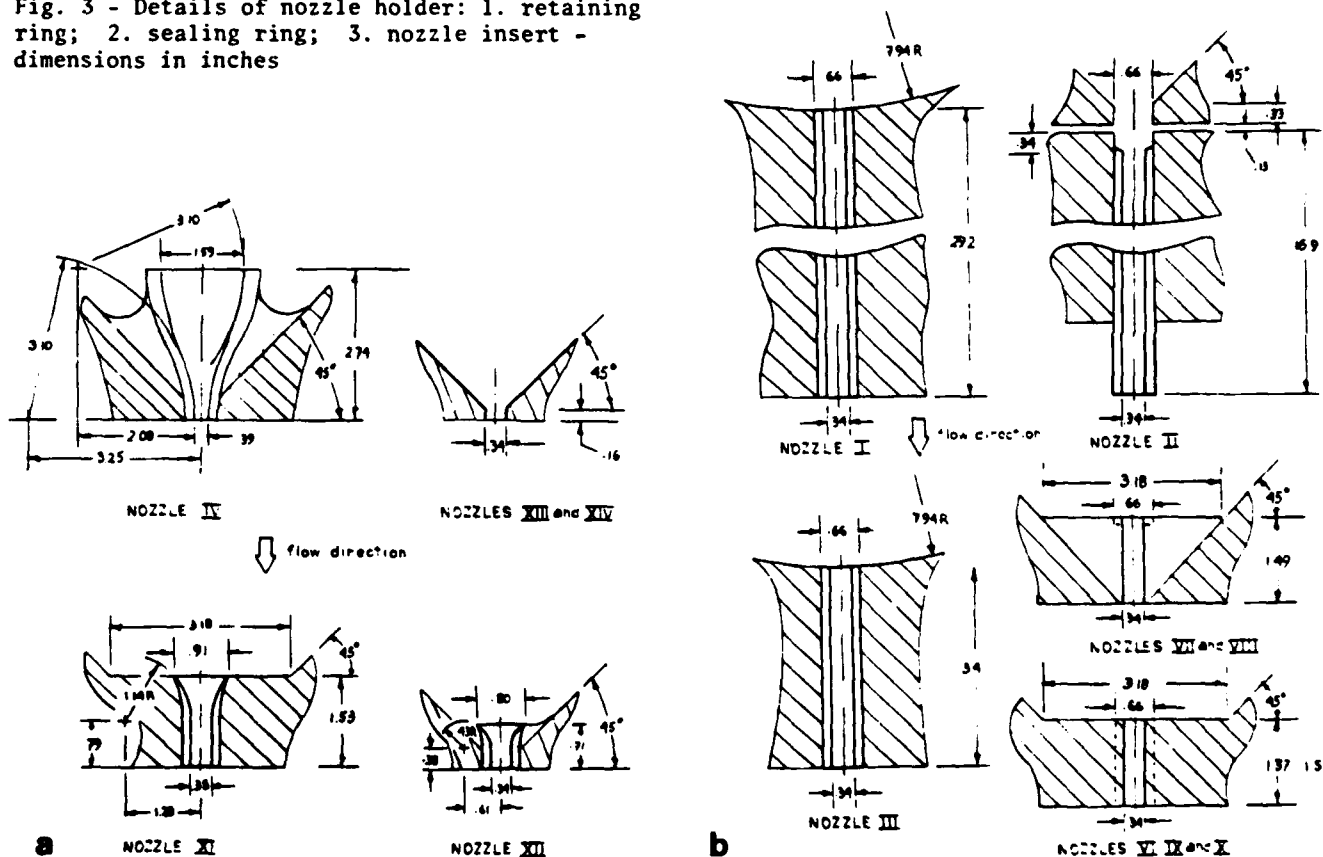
Schematic diagram of nozzle passage designs a) Converging nozzles; b) Constant diameter tube nozzles - dimensions in mm
